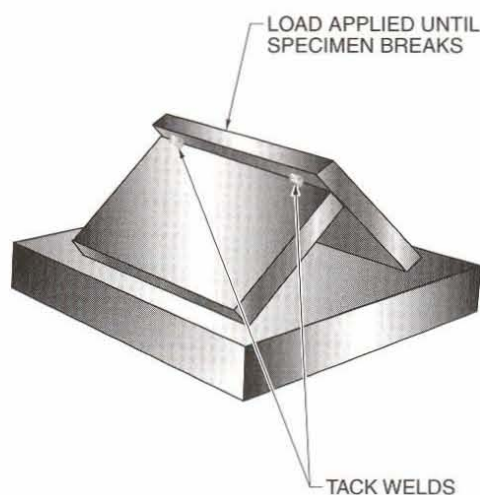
The fillet weld break test is used by an inspector to qualify tack welds.
